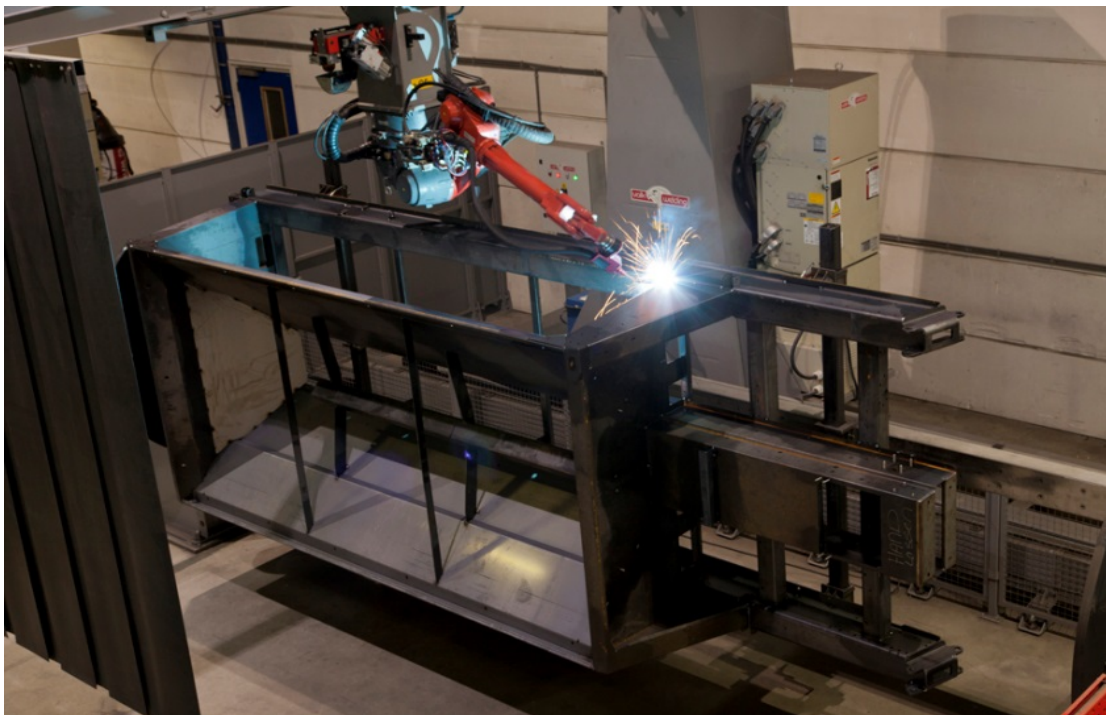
The robotic welder in action with a 90-degree rotated fixture. (Source: Aebi Schmidt)
